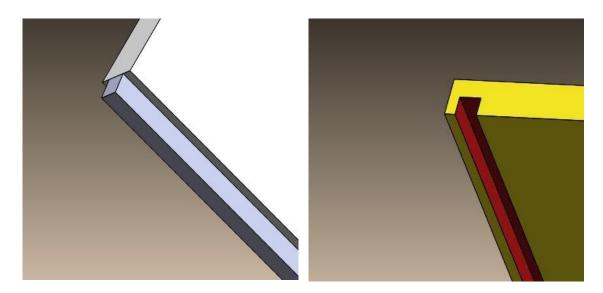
(Left) Tongue Protrusion on the Front and Back face; (Right) Groove Depth on the Side Faces
